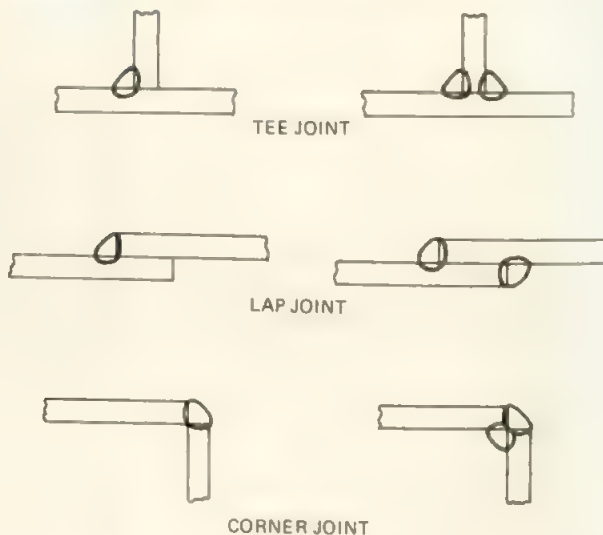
Applications of single and double fillet welds.
